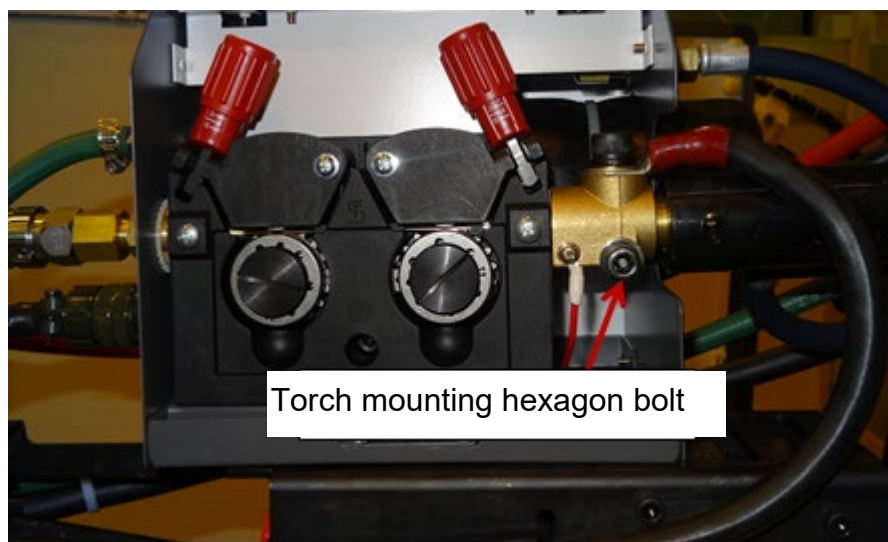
(h) Mounting position of torch cable changing tool
